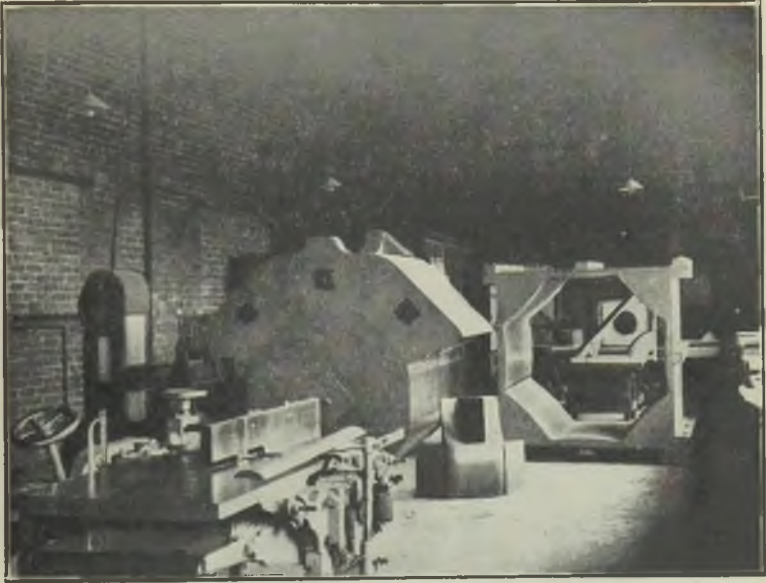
PATTERN FOR A LARGE OCTAGONAL MOULD.
